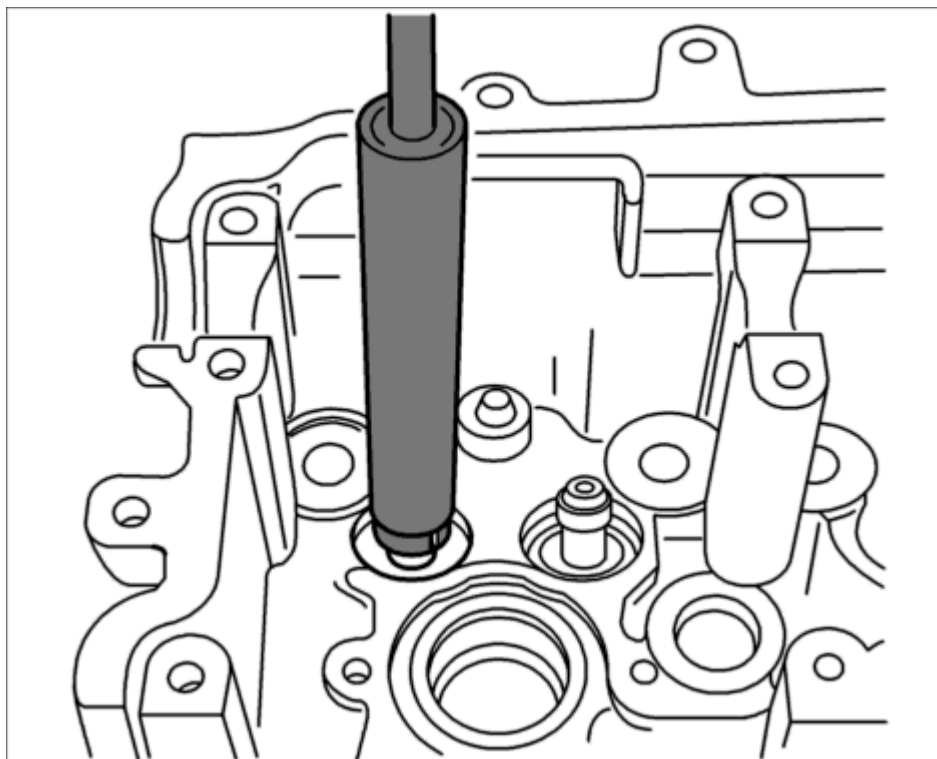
Pulling off the valve-stem seal (VW-special tool 3364)
